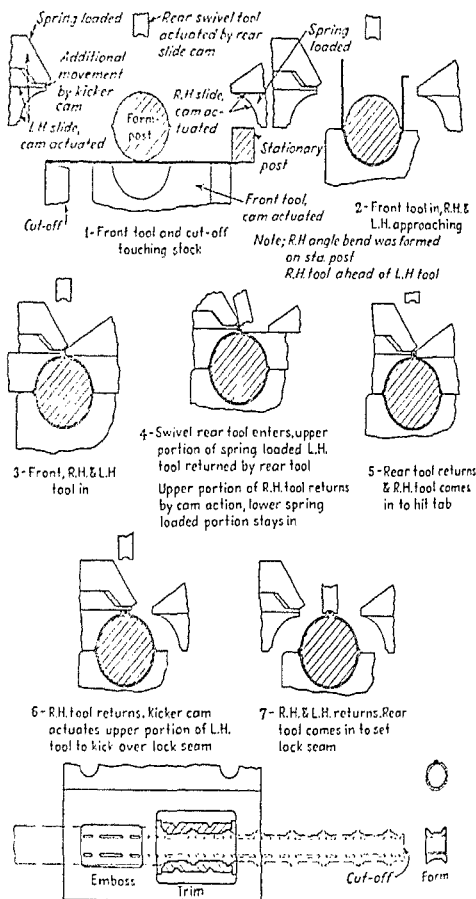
Forming a part with a lock seam with tooling on a multiple-slide press. (U.S. Tool Co., Inc.)
